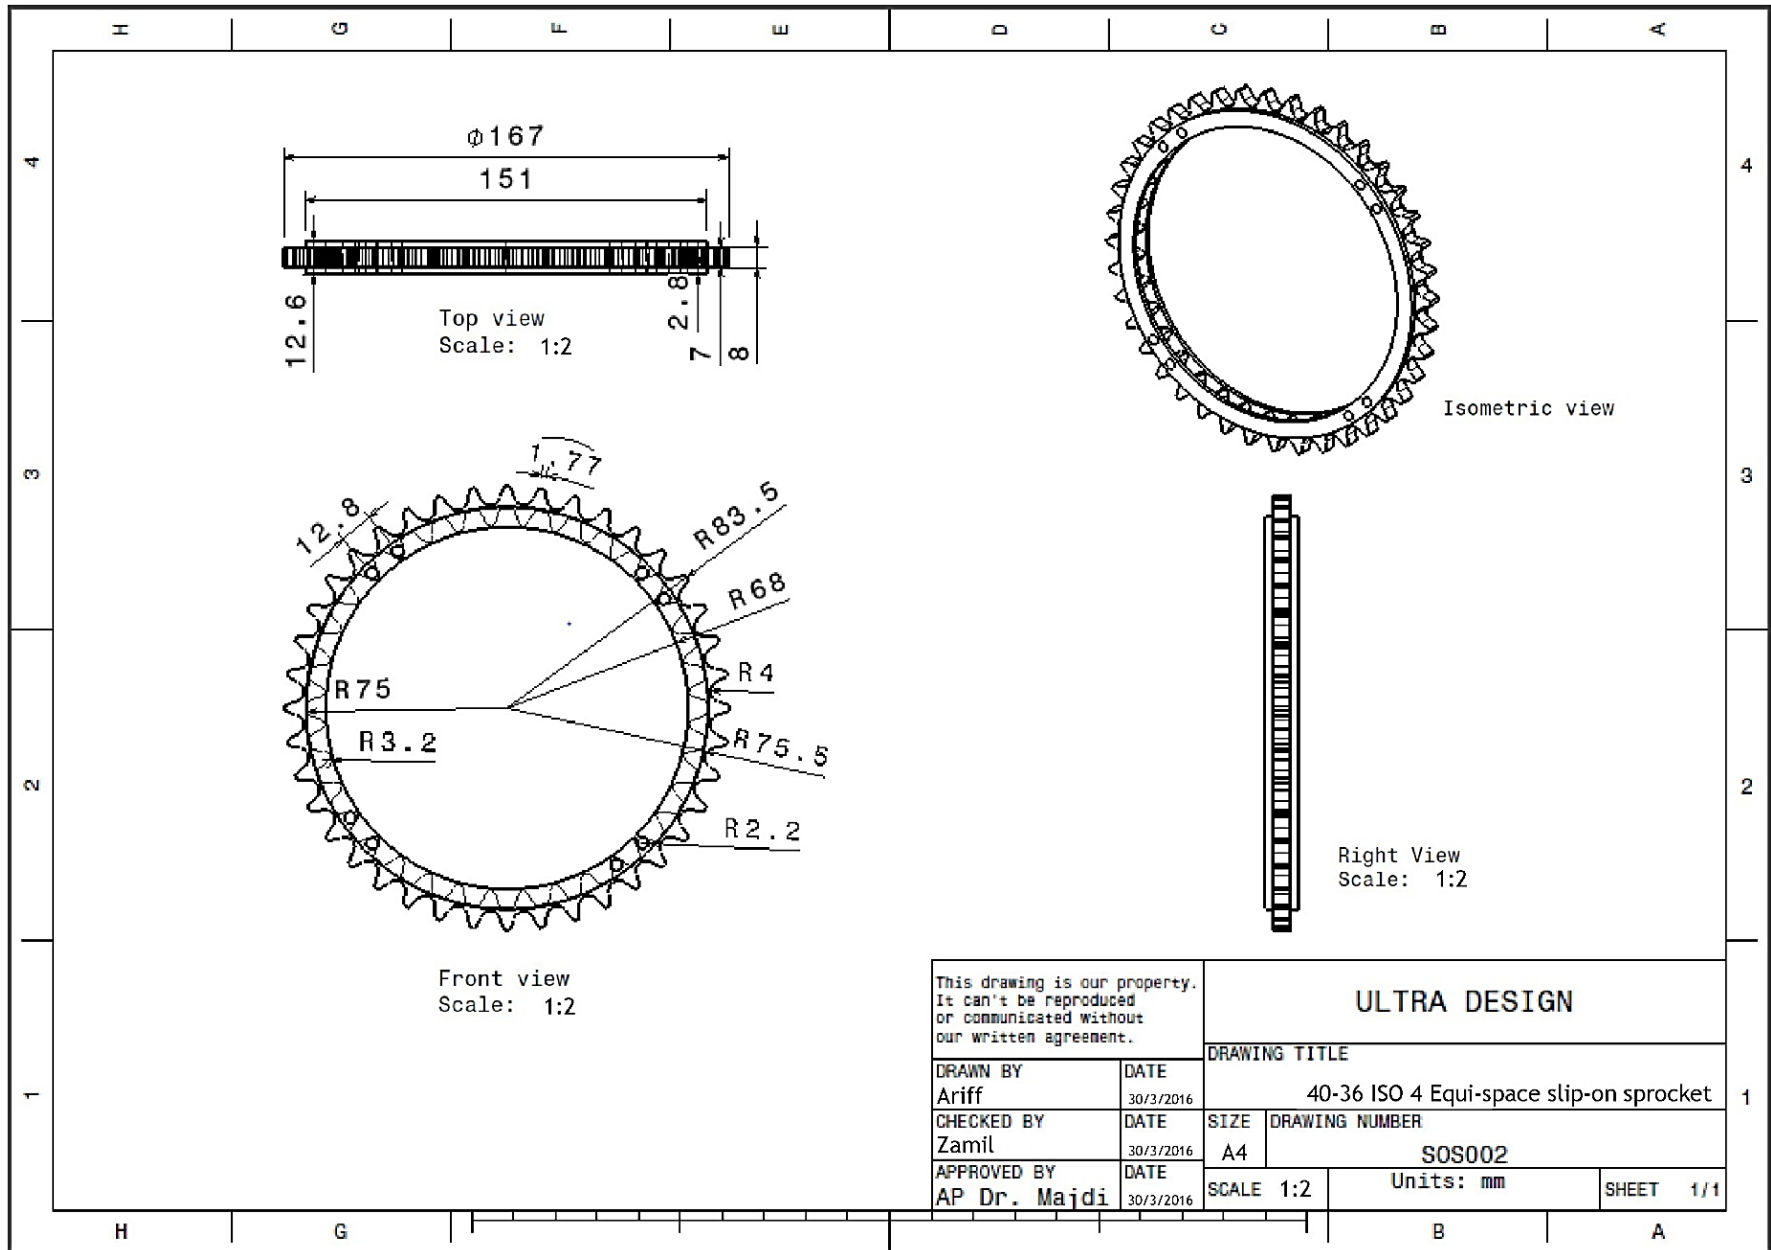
Engineering detail drawings of improved slip-on sprocket design
